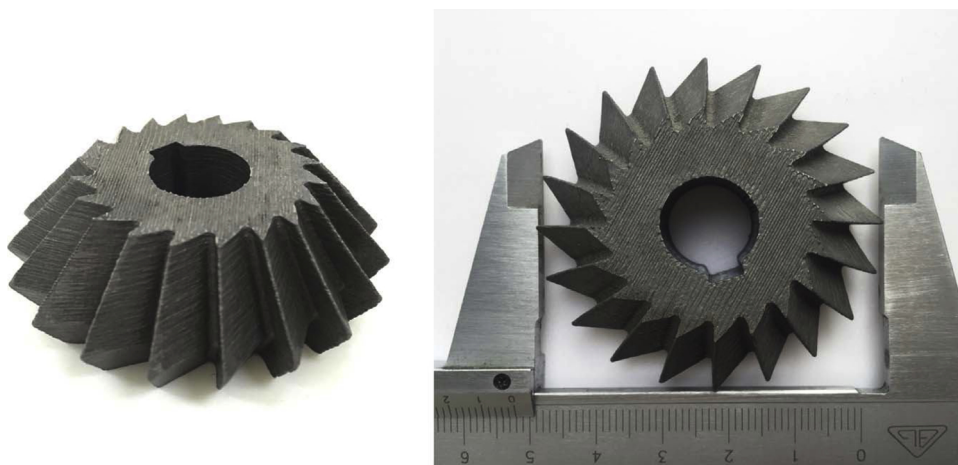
A bevel milling cutter (52 mm in diameter) produced by 3DGP and sintered at 1360 °C [34].
